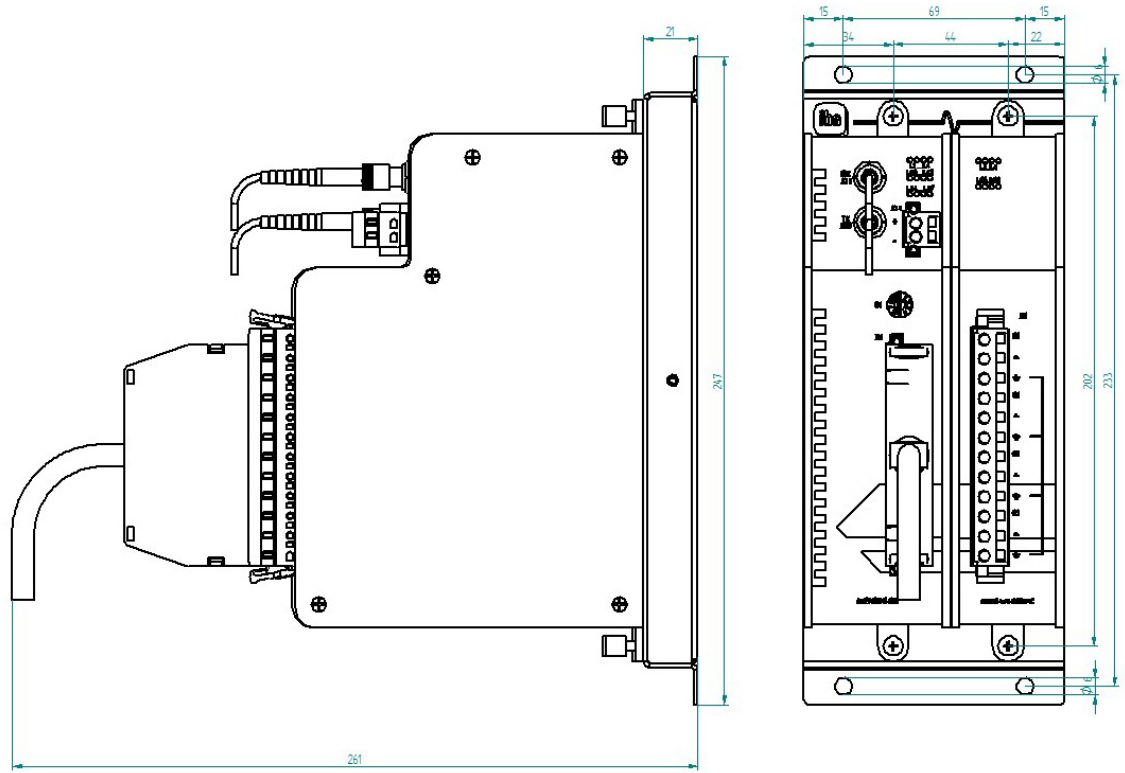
Dimensions mounting angles with ibaPADU-S-B4S
